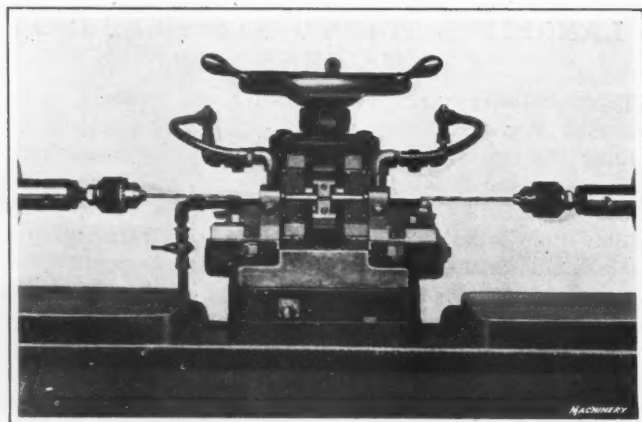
Close View of Drills and Work on Machine shown in Fig. 1
